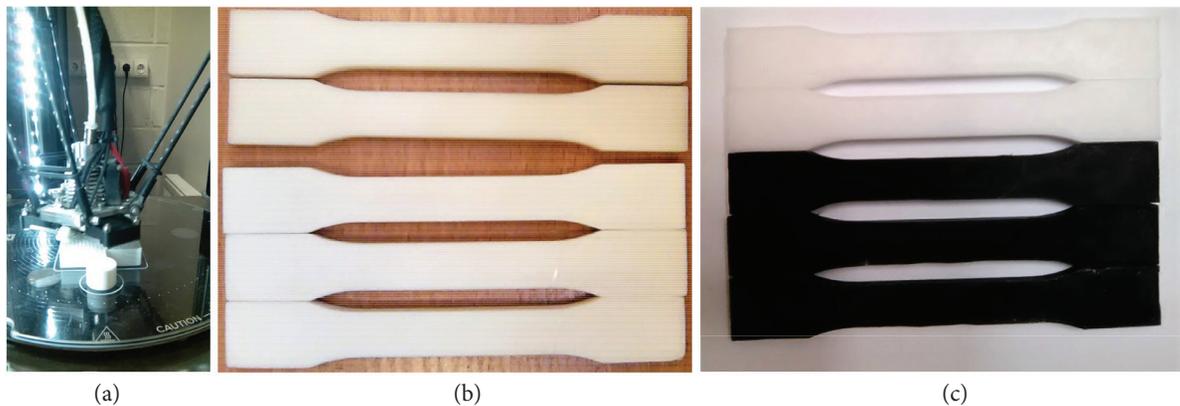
3D printing: (a) printing process; (b) specimens printed of ABS (two top specimens) and PLA (three bottom specimens); (c) HIPS specimens (white) and PETG (black)
